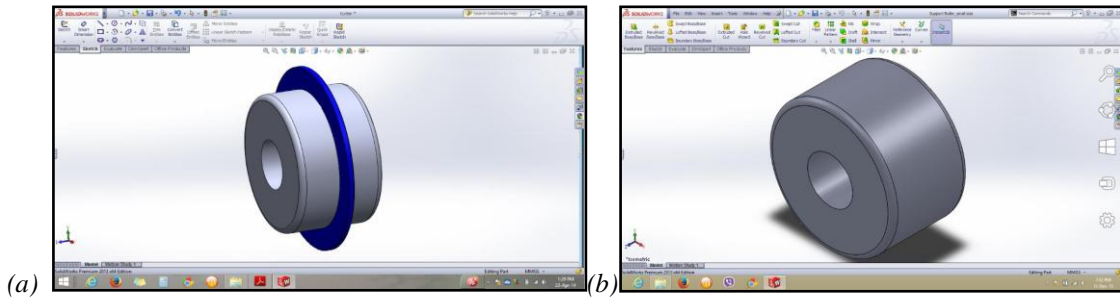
(a) Impression Cutter/Roller (b) Support roller
